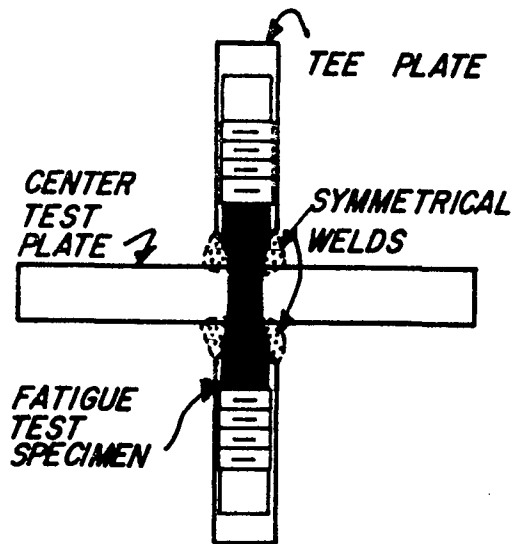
Test Specimen from a Welded Plate, Through Dir. (Ref. 95)
